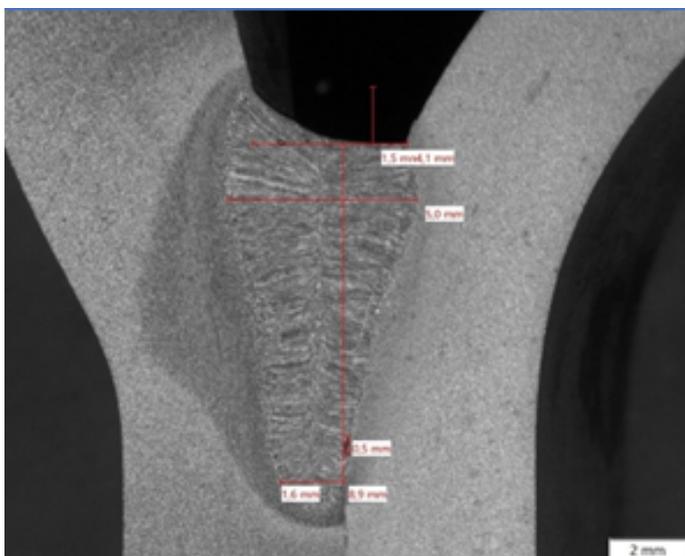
Exemplary application of the laser beam in the making of a hard-to-access joint
